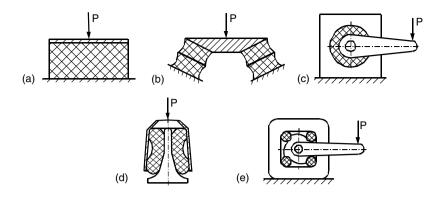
Rubber-metal springs: (a) compression; (b) compression and shear; (c) torsion; (d) bell type; (e) cam type.
